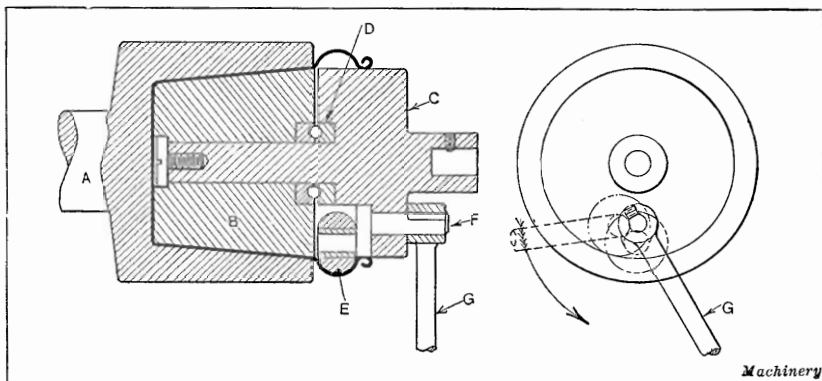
Producing a Bulge Near the Open End of a Drawn Shell
